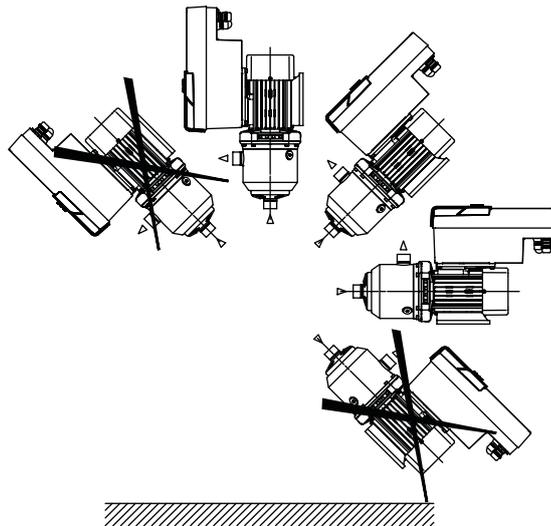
Permitted installation positions with motor shaft and electronic module facing up (0°)
